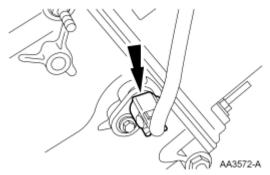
Camshaft Position (CMP) Sensor Electrical Connector Courtesy of FORD MOTOR CO.
